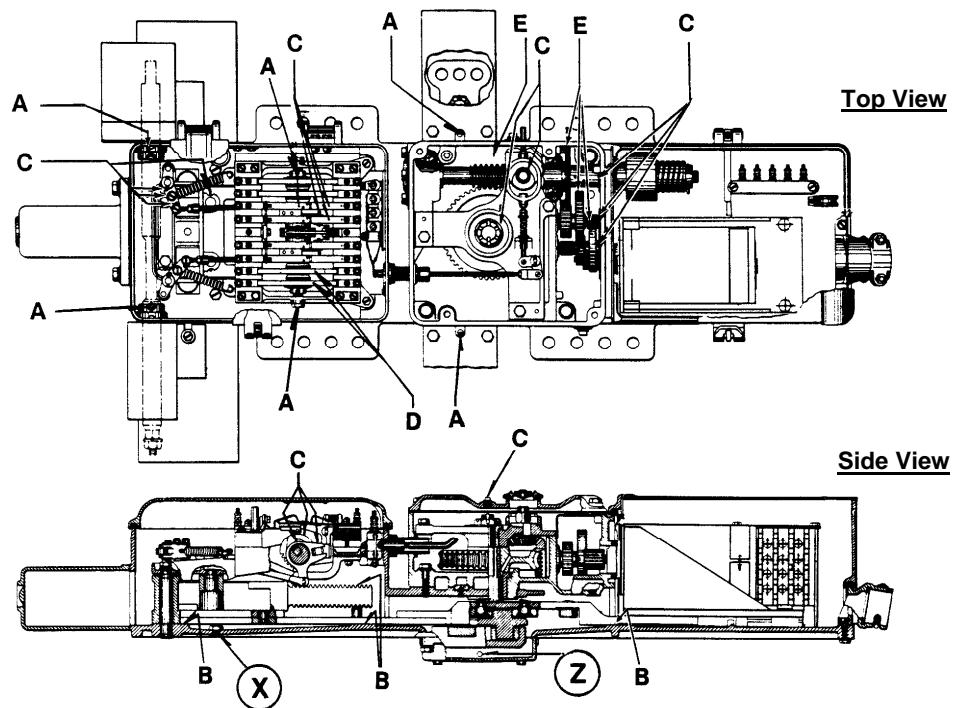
Lubrication Diagram for M-3 Switch Machine
